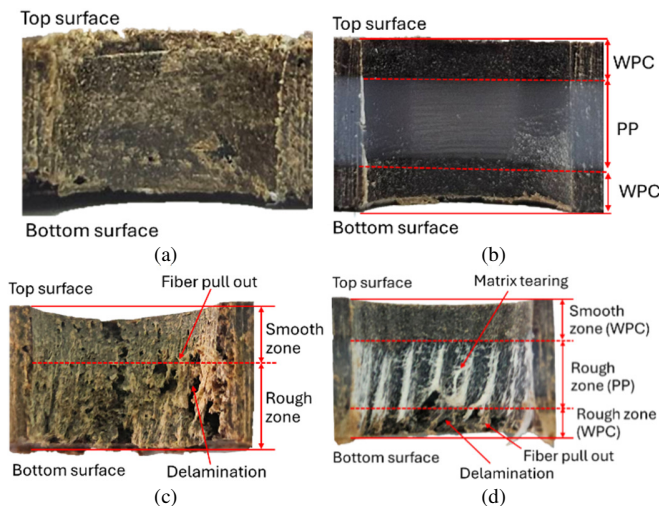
Surface roughness: (a) drilling of single-layer WPCs, (b) drilling of three-layer, (c) AWJ cutting of single-layer WPCs, and (d) AWJ cutting of three-layer.
